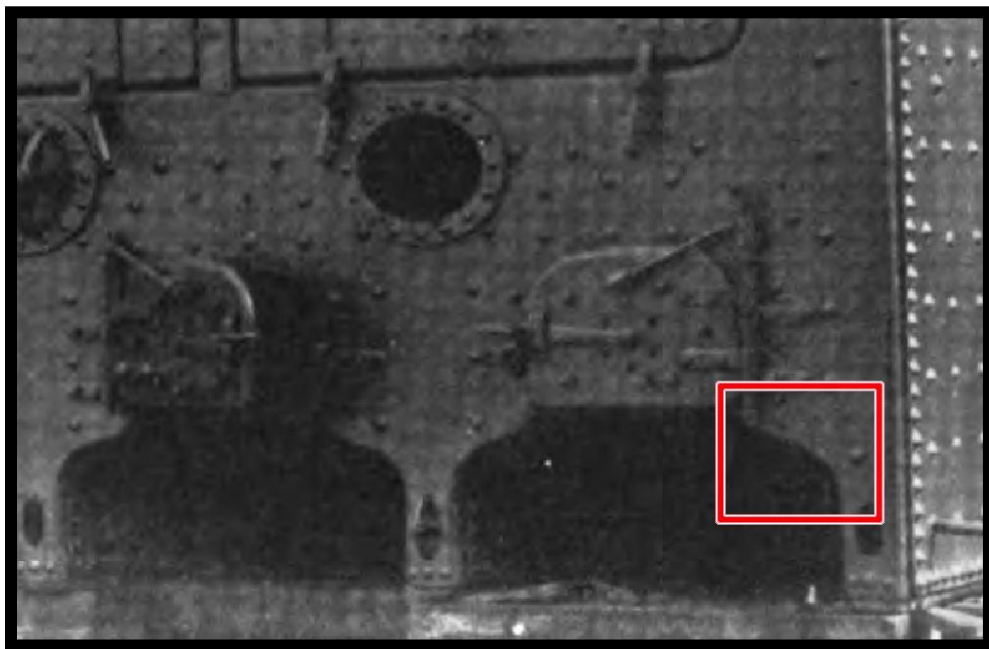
Transition plates the between lower ash pit and upper fire door frame (Unidentified 1902:523).
